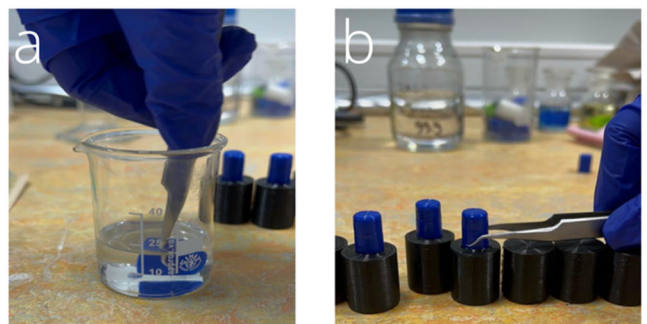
a) Submerging the small cylinder in THF; b) placing the piece on the upper surface of the big cylinder
